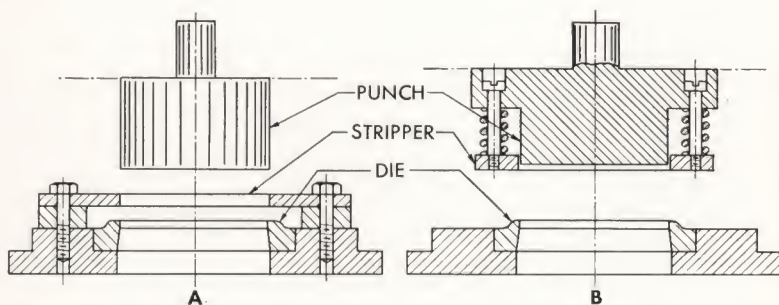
Scrap may be removed from the punch by stationary or spring strippers.
